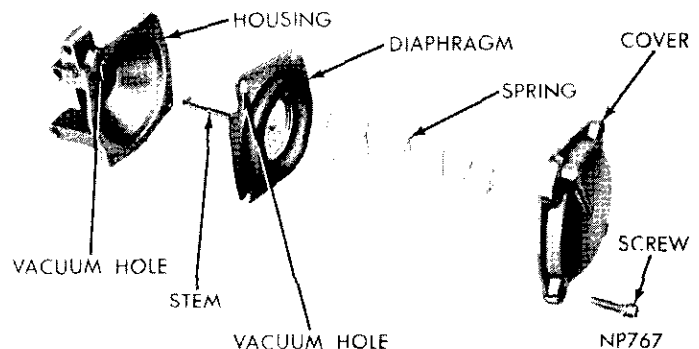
Secondary Throttle Diaphragm (Exploded View)
